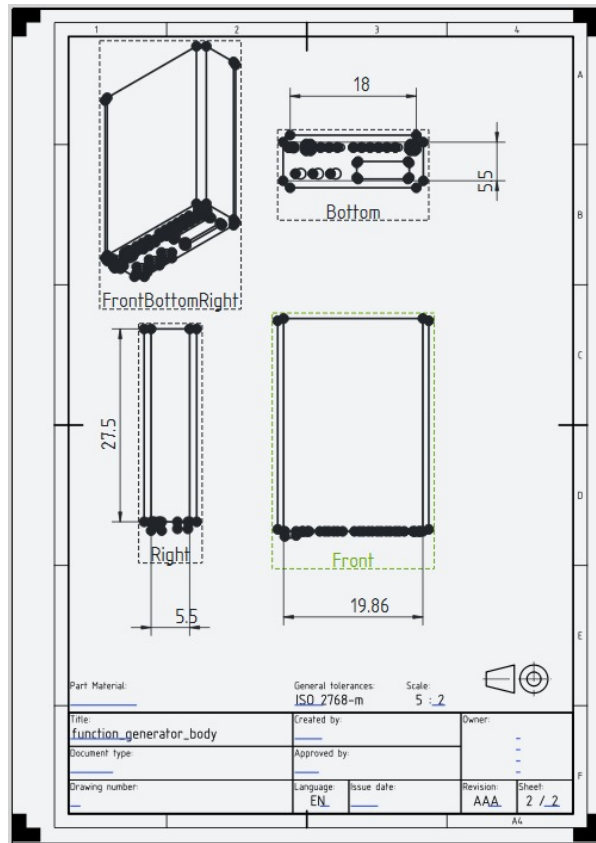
Drawing of Body(Produced using FreeCADweb)
